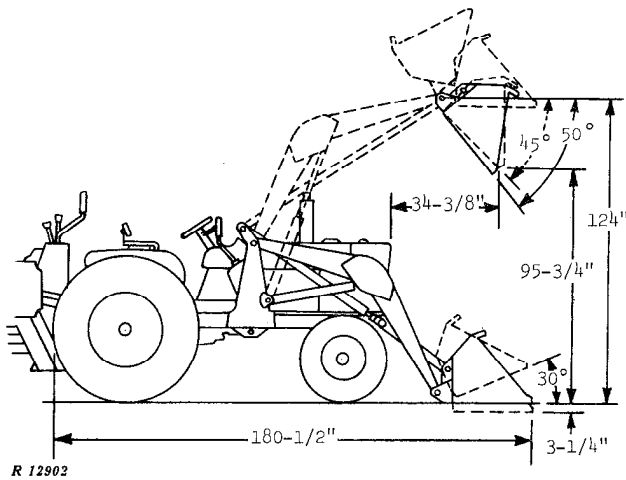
Loader Equipped with 7/8 Yard Bucket
